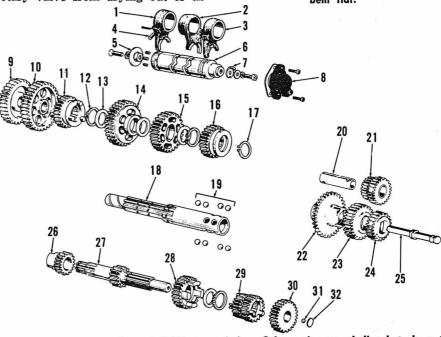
Exploded view of G4TR transmission. Other units are similar but do not have two speed gear box (20 thru 25) and enlarged output shaft (18).
